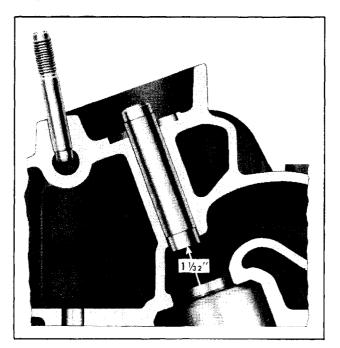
Cross Section of Valve Guide Installed in Cylinder Head
